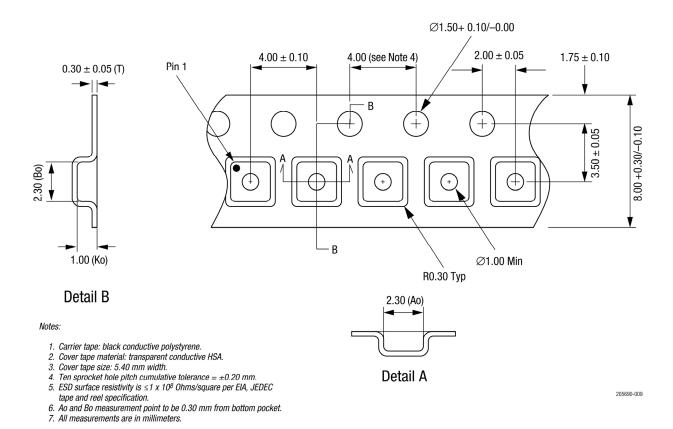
SKY67181-396LF Tape and Reel Dimensions
